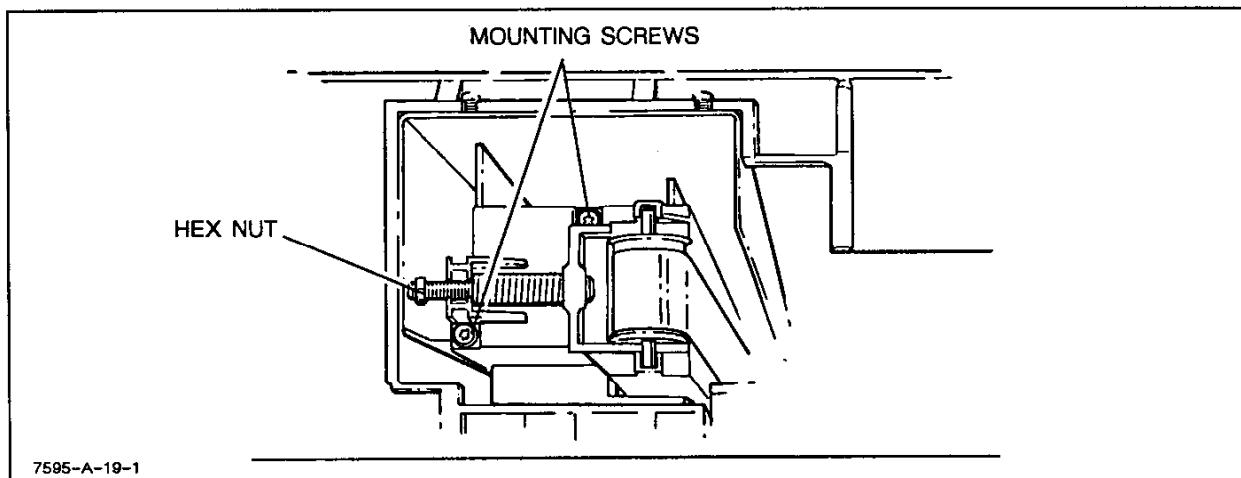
Pen Carriage Drive Belt Tensioner Assembly Removal
